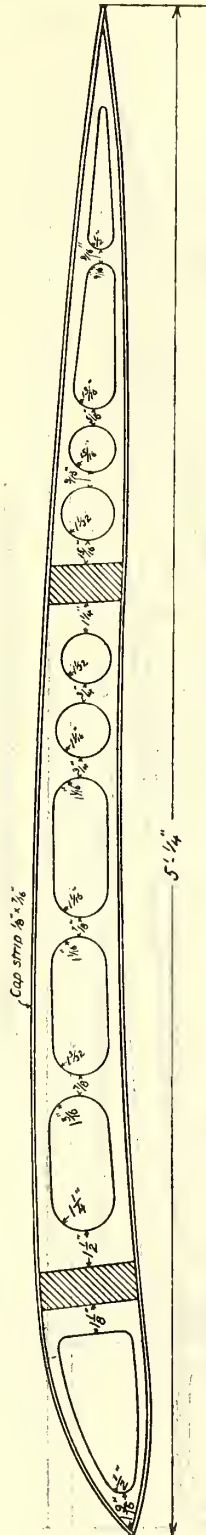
Circular opening type wing rib for SE-5 machine.
